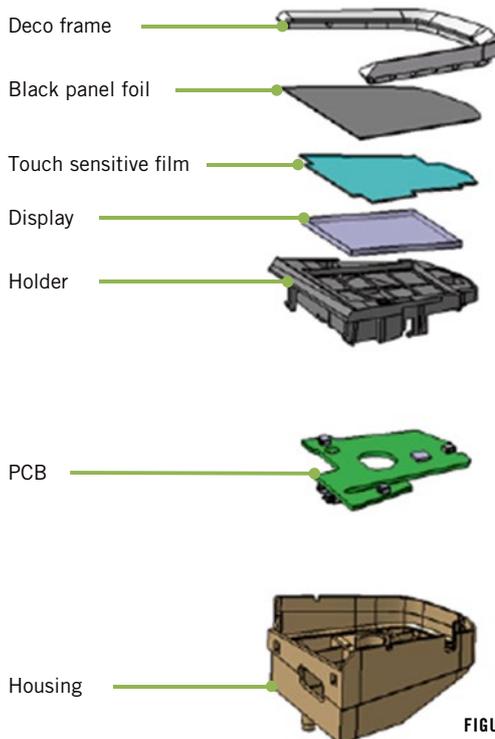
Exploded view of the display based steering wheel switch (© Valeo)
